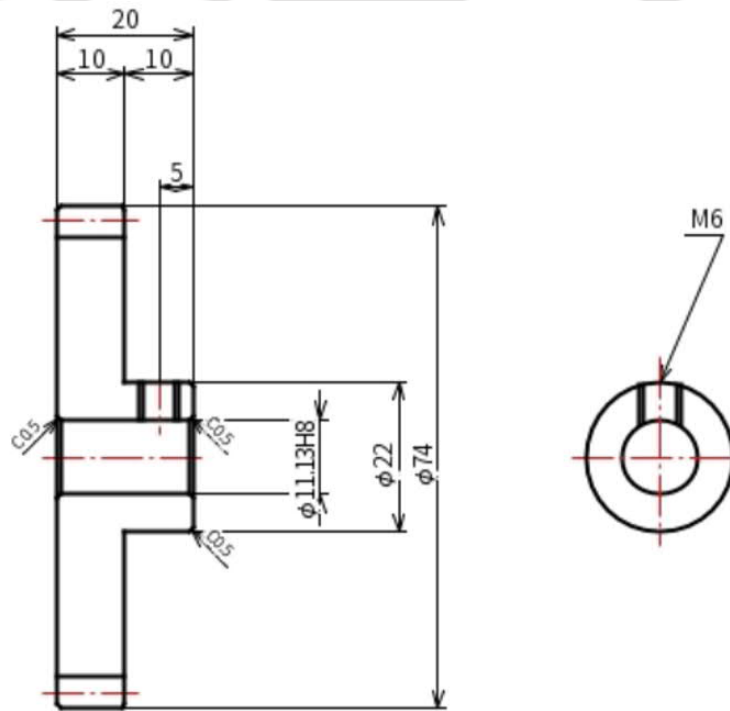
Gear drawing (G- Gear grinding, C- Chamfer, M6- 6 mm pitch metric thread)
